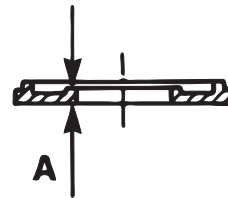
Seal (pos. 207) – A = Min. 1.5 mm
